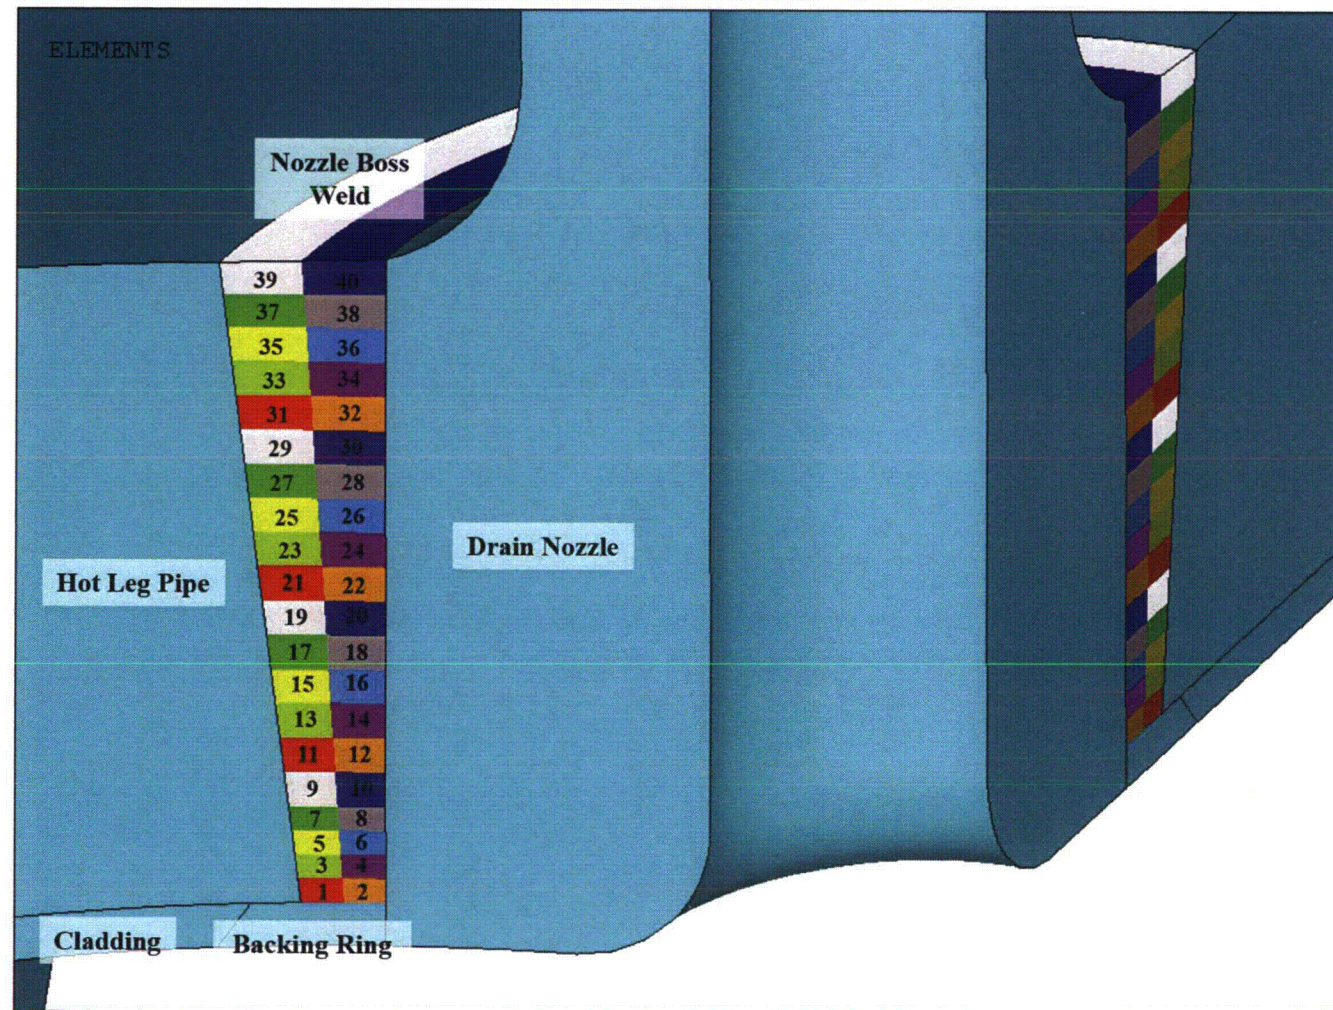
Weld Nugget Definitions for the Hot Leg Drain Nozzle Boss Weld
